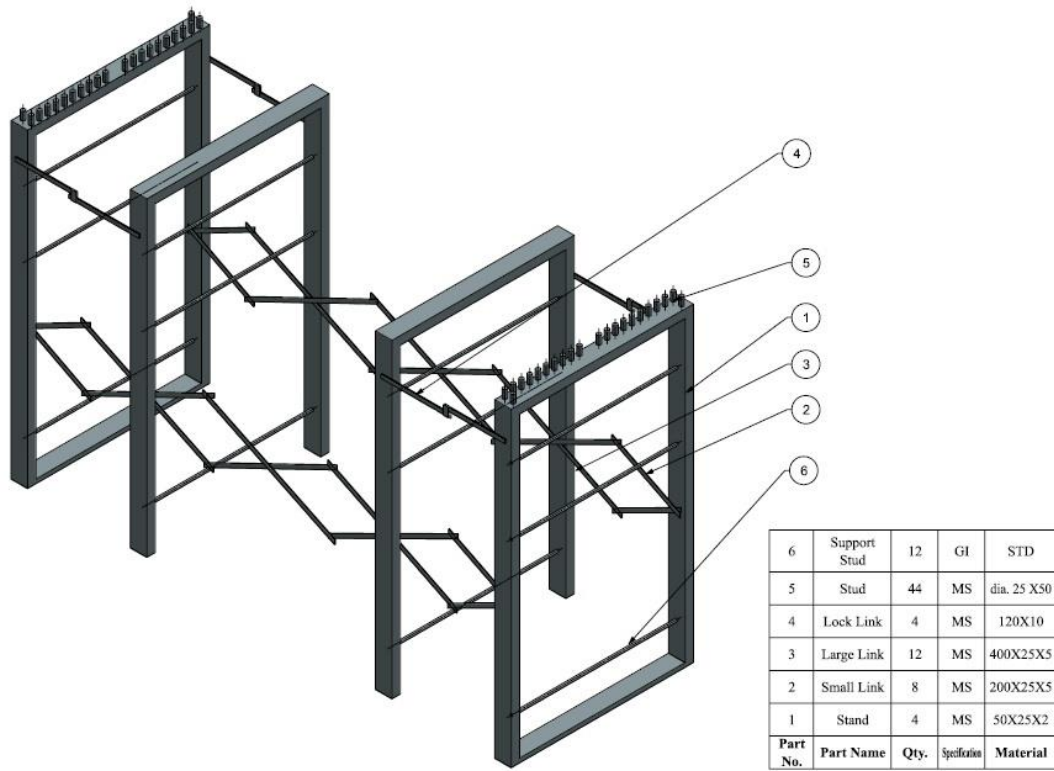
Detailed 3D Drawing of Foldable Multitasking Workable Platform for Rebar work (Isometric view)
